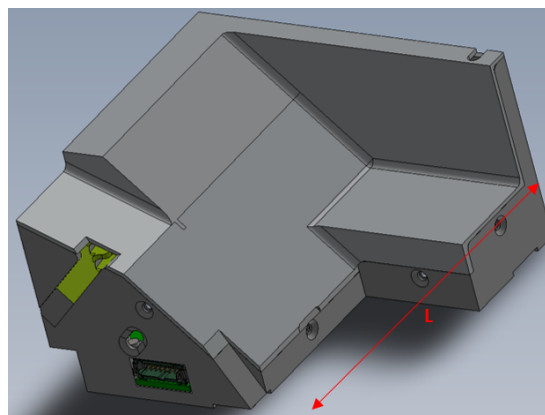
CubeCAT laser engine mechanical casing top view.
